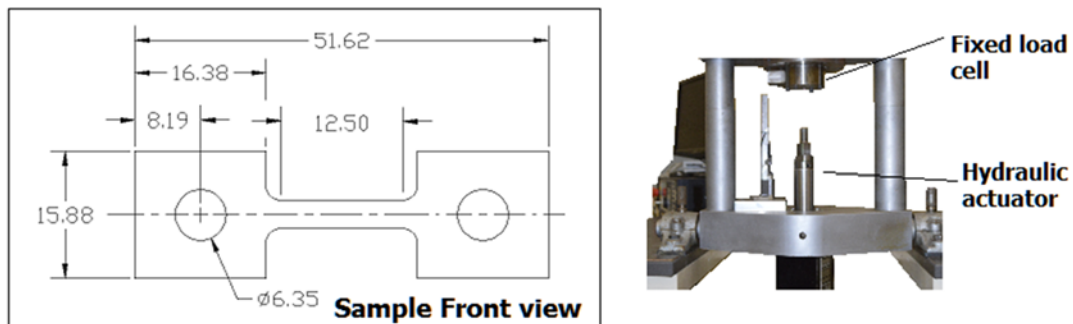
Testing sample geometry (dimensions in mm) and testing frame
